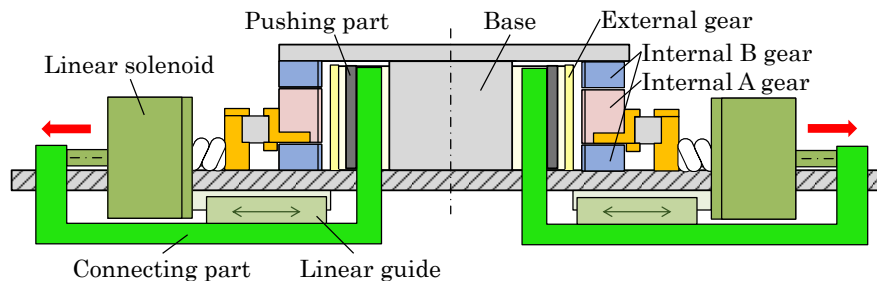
Force transmission from linear solenoids to the external gear through linear guides, connecting parts, and pushing parts
